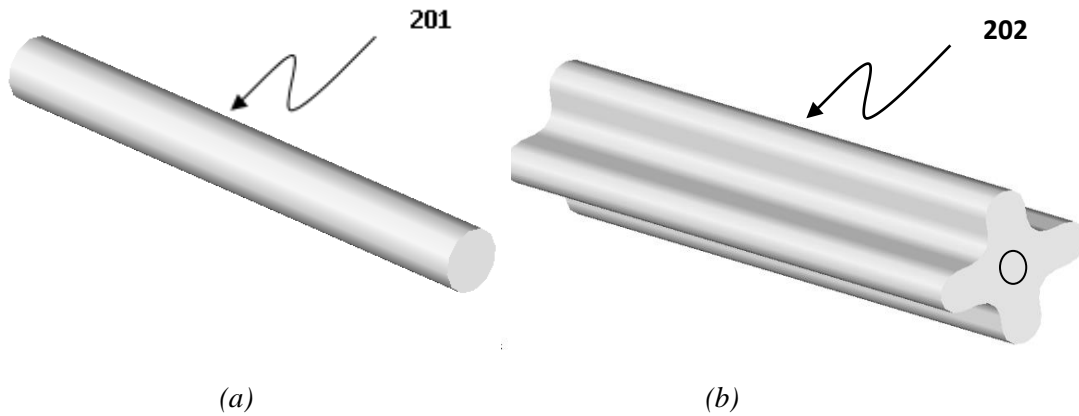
(a) Perspective view of an inner shaft, (b) Perspective view of an outer shaft
